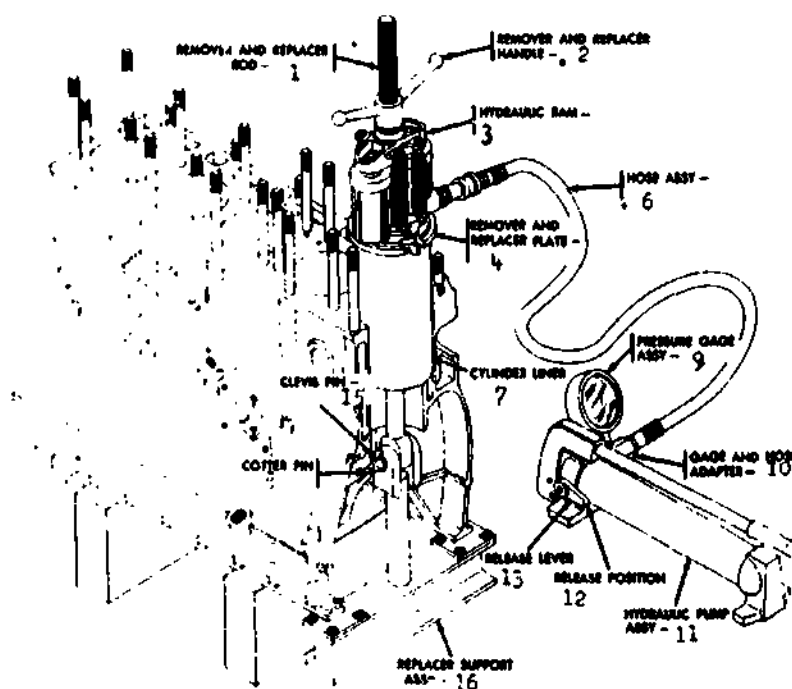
Cylinder sleeve remover and replacer kit and ram kit showing proper method of cylinder liner installation.
